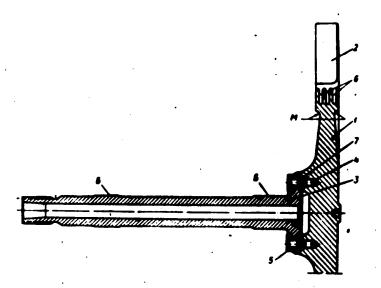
Turbine Rotor Shaft of Axial Flow Compressor Engine Rotor disc, 2 - Blades, 3 - Shaft, 4 - Stud, 5 - Stud nut, Disc slots, 7 - Bushing.
